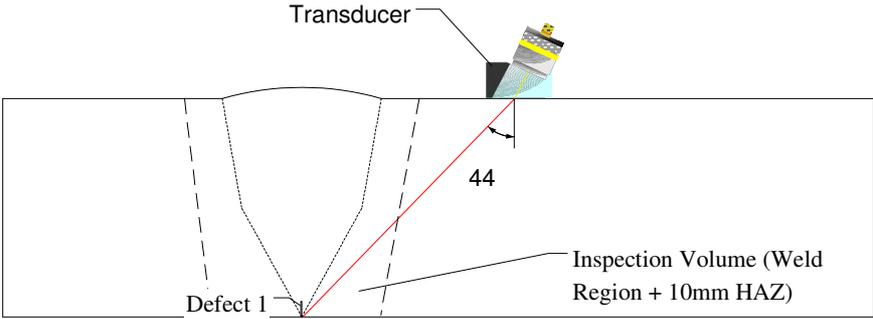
Schematic of pulse echo shear wave inspection technique of Defect 1 (lack of root fusion) using a single crystal transducer.
